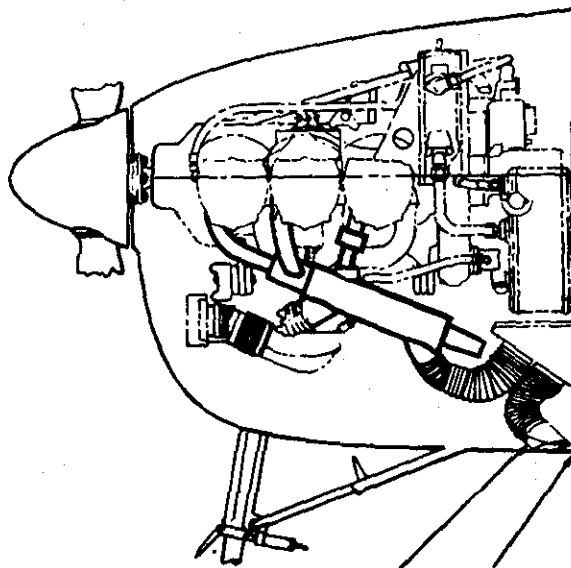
Exhaust system of a horizontally opposed engine.
